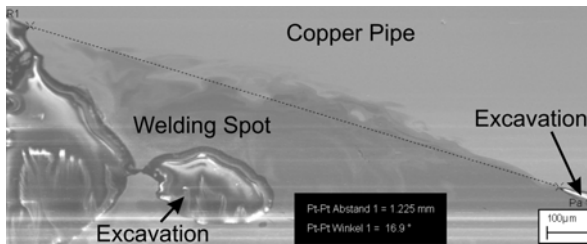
Welding Spot – Micrograph Perpendicular to Axis of Pipe
